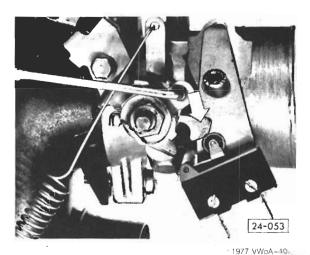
Microswitch roller centered on throttle valve shaft cam (arrow).
